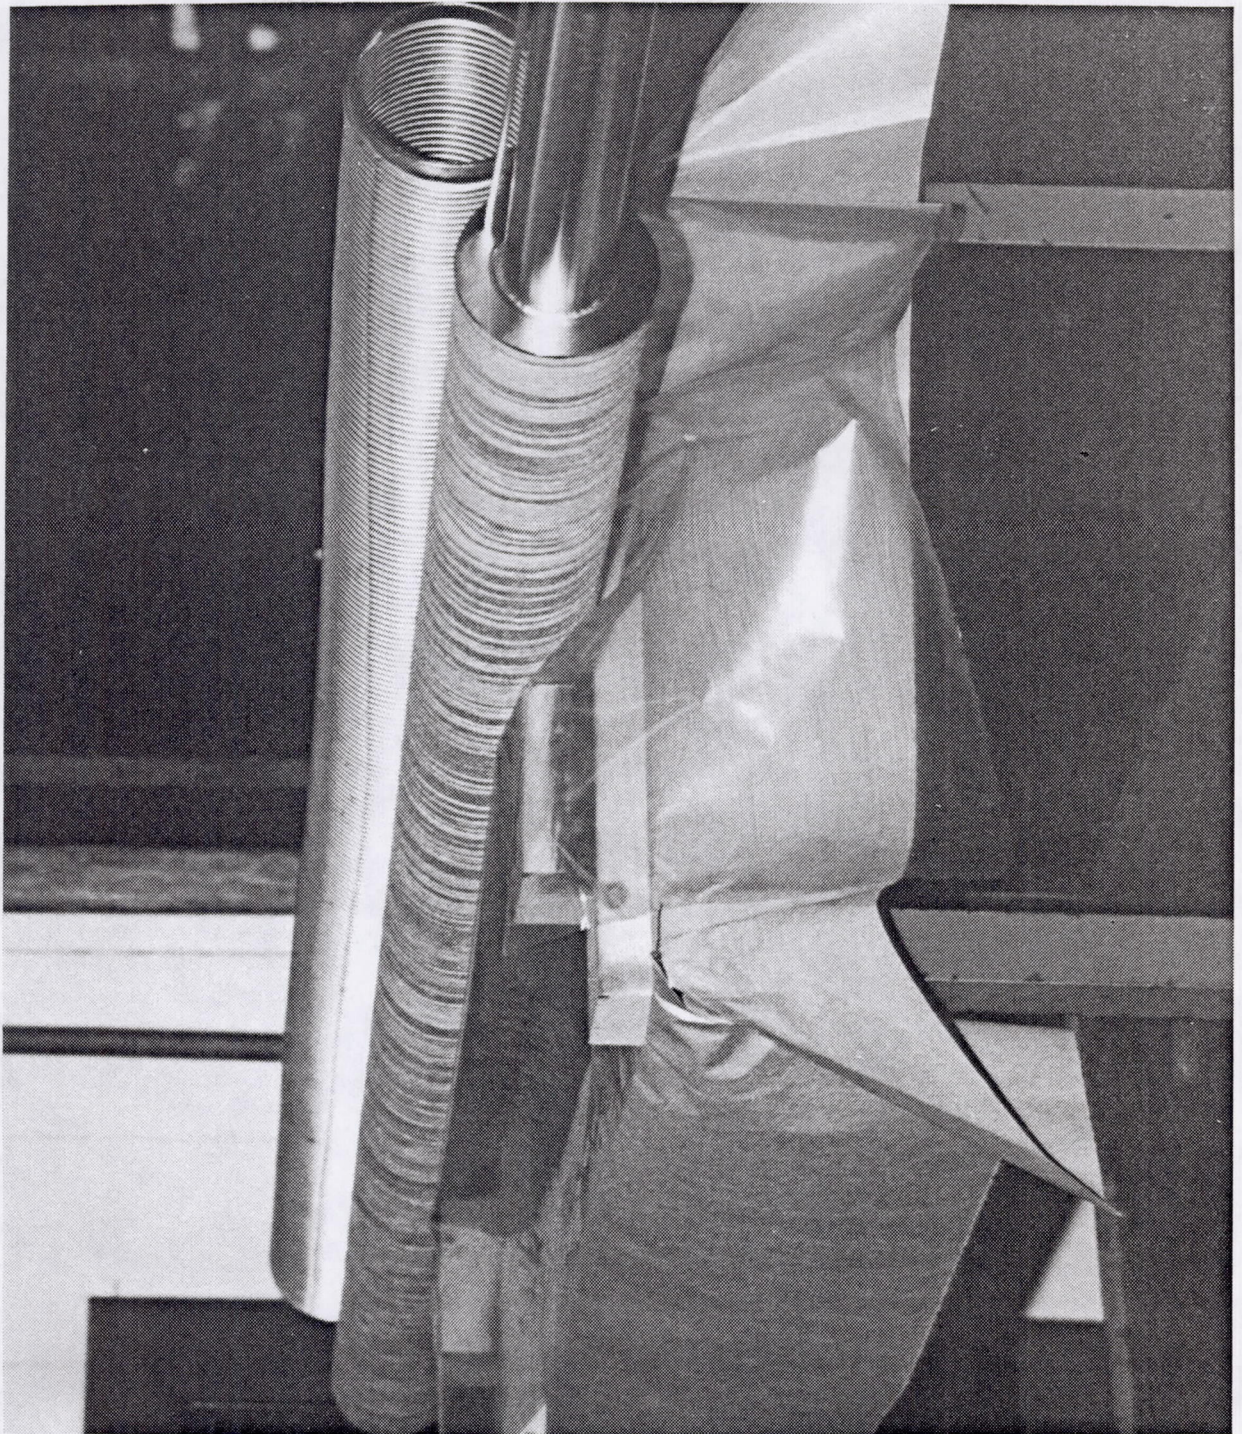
SDHRT Heat Storage Tube Showing Nickel Felt Installed on HX Tube and Corrugated TES Containment Tube Ready for Assembly
